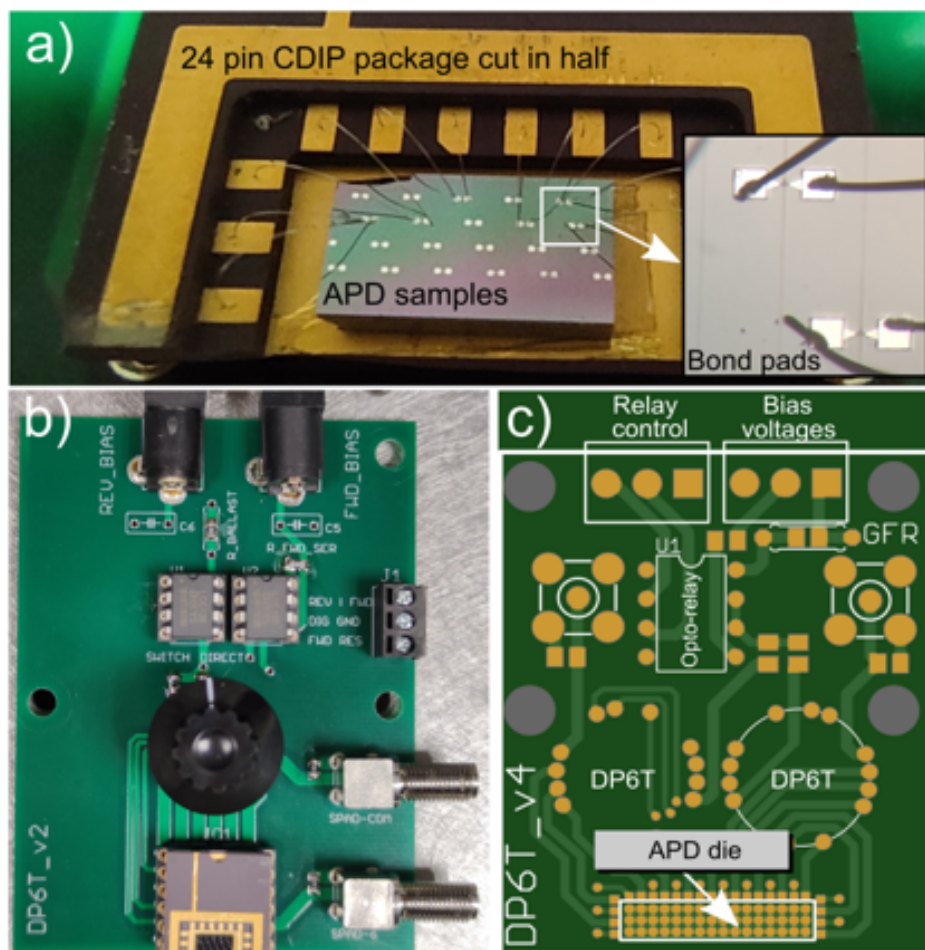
Quenching circuit board designs for wirebonded APDs. a) The devices are wire bonded to the pins of a 24-pin ceramic dual in-line package (CDIP) that is cut in half. The inset shows the zoomed view of the wire bonded contact pads. a) The photograph of the custom electronics board accommodating the wire bonded devices on a CDIP package. c) The alternative board design for low temperature operation. Here, the devices are directly wire bonded onto the exposed pads of the printed circuit board.
